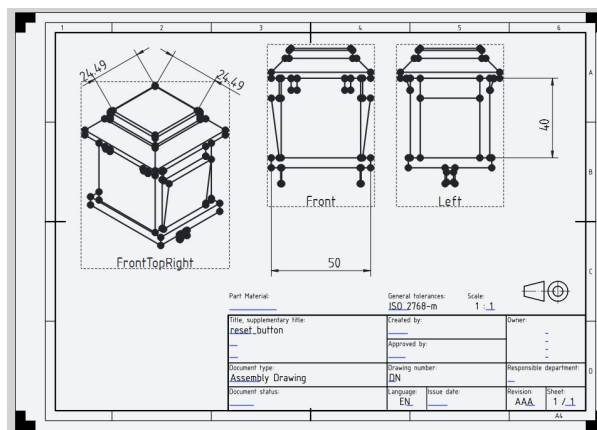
Drawing of Reset Button(Produced using FreeCADweb)
